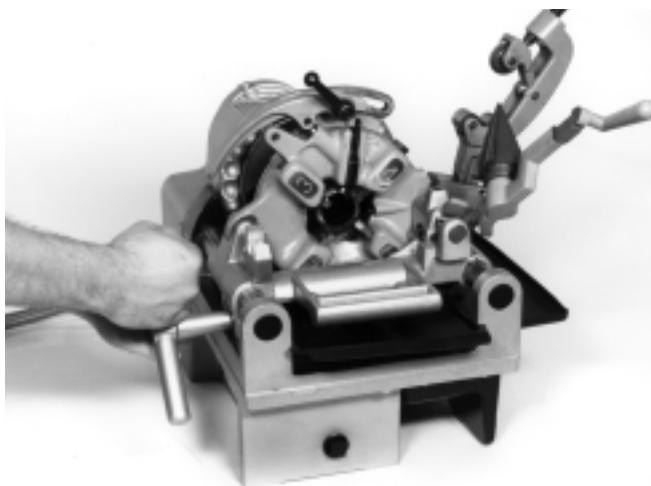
Threading Pipe with No. 815-A Self-Opening Die Head
